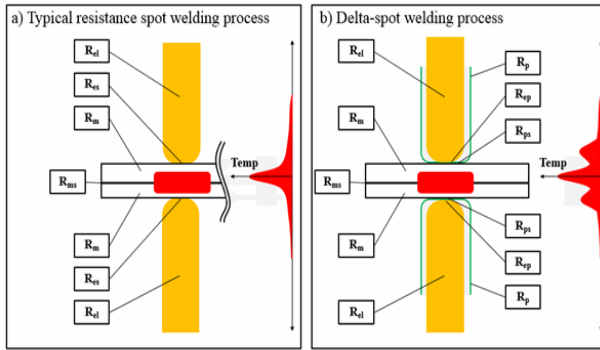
Distribution of resistance in (a) typical resistance spot welding; (b) delta-spot welding process test.
